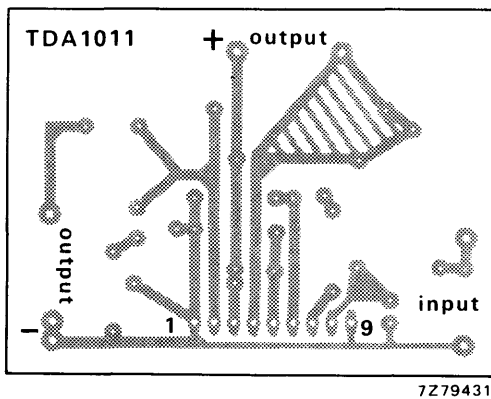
Track side of printed-circuit board used for the circuit of Fig. 4; p.c. board dimensions 62 mm x 48 mm.
